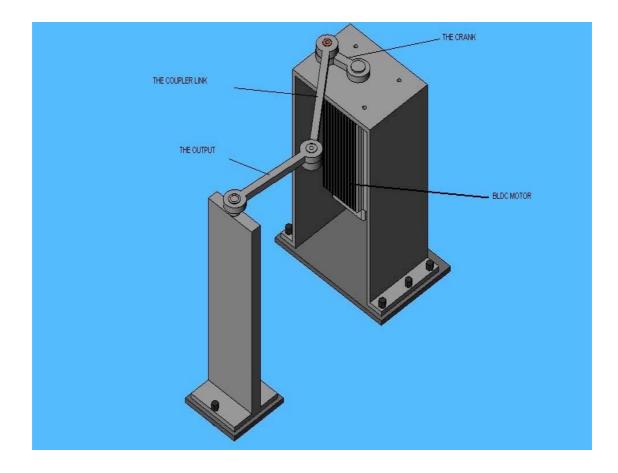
(a) An assembly view – Four Bar Mechanism
